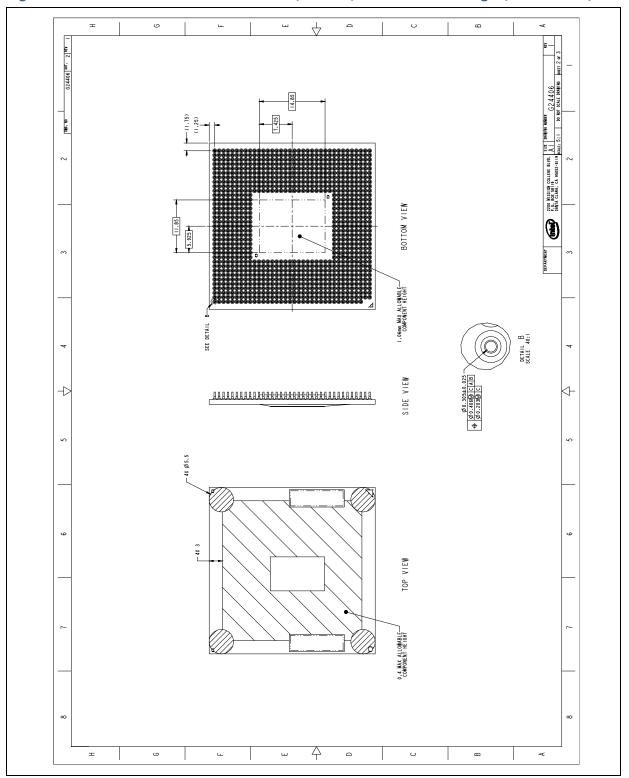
Processor rPGA988B 2C/GT2 (G23867) Mechanical Package (Sheet 1 of 2)
